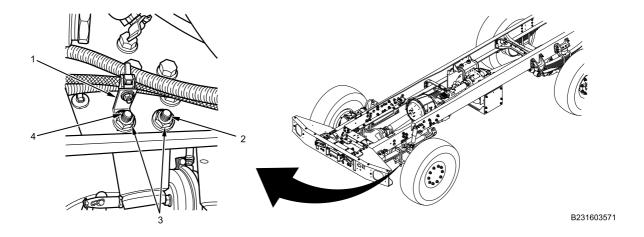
Front Axle Bumper Stop Bracket Locknut and Harness Clip Extension Installation.
